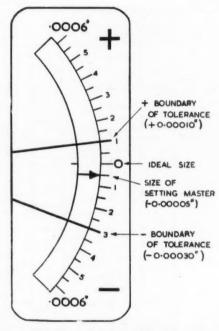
Scale of measuring instrument used to inspect parts described in the Paper.
